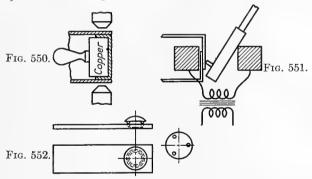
Welding both sides of a box form simultaneously, by employing a shunt-block device.
